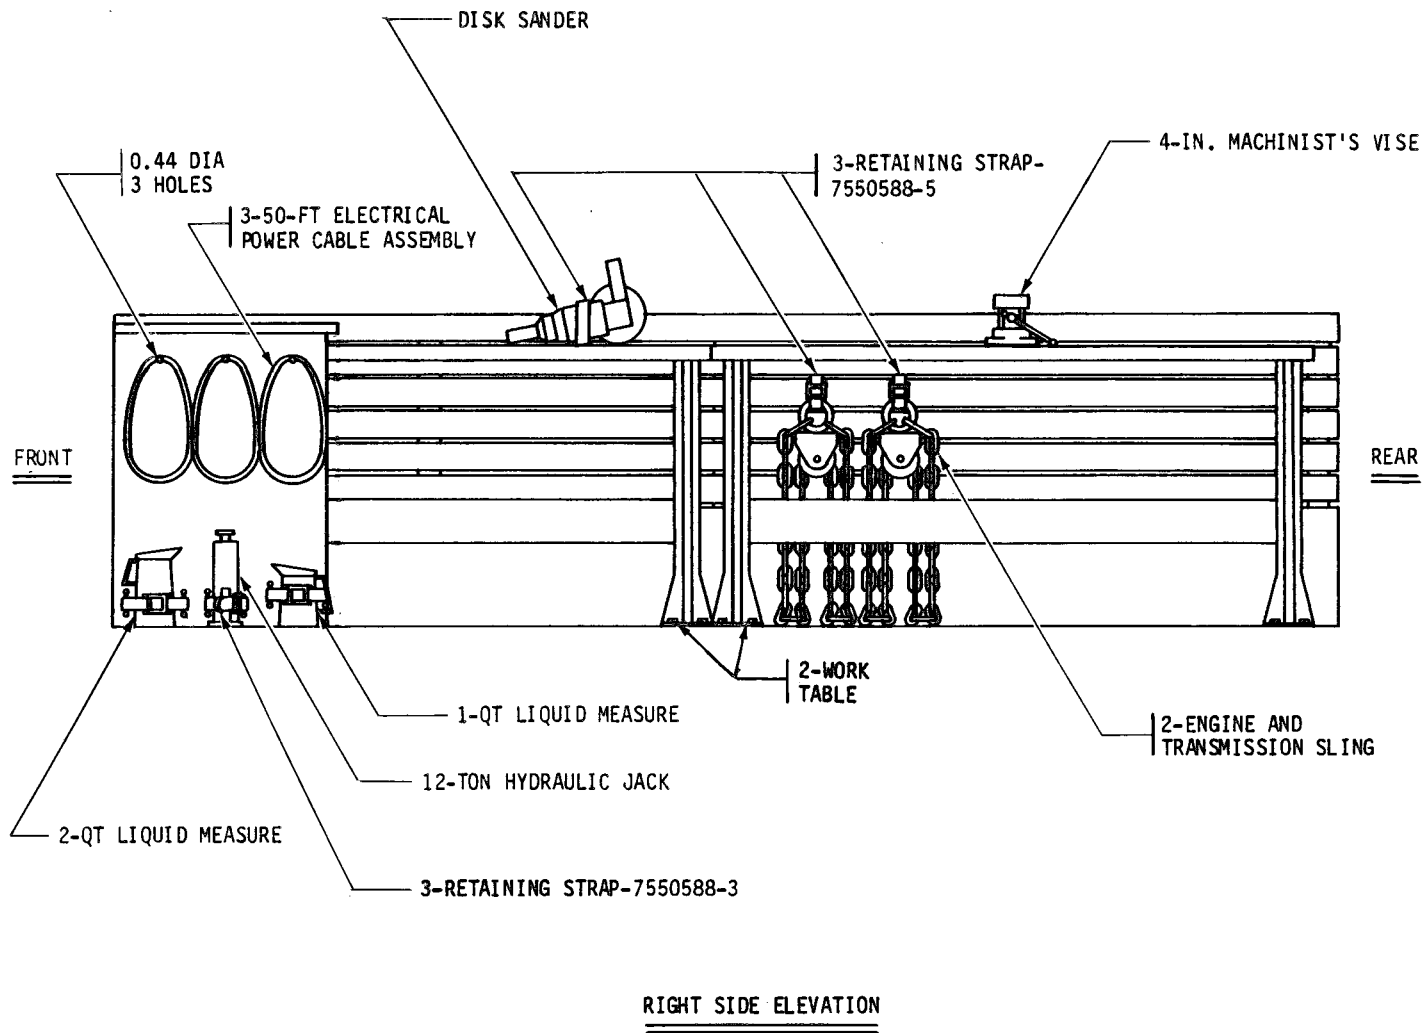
Components to be mounted, unit 2, M35A2, right side elevation.
